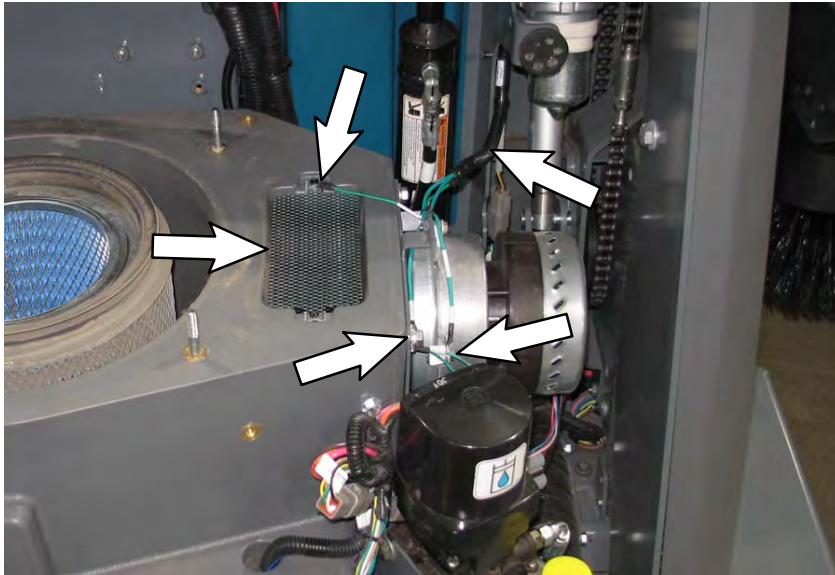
Harness, Ele [Static Gnd, M17] / Plate, Fan, Guard
